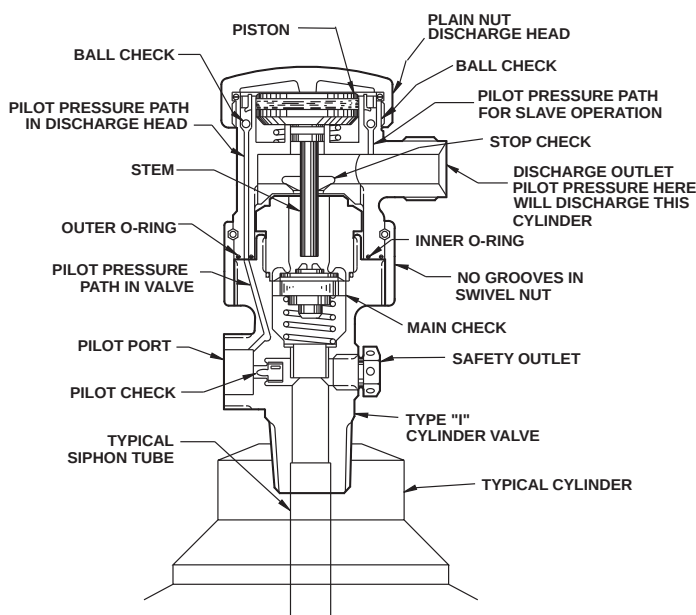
Assembly of Plain Nut Discharge Head to Type "I" Cylinder Valve
